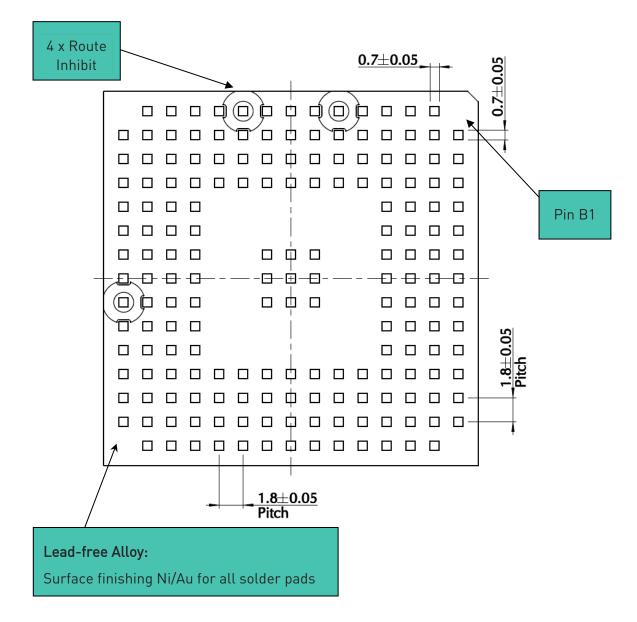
LE910S1 Mechanical Dimensions (Bottom View)
